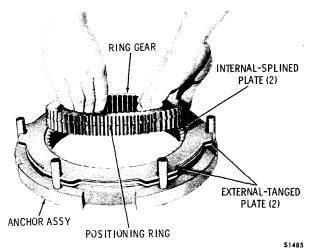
Assembling high-range clutch and anchor (-3 overdrive model)
